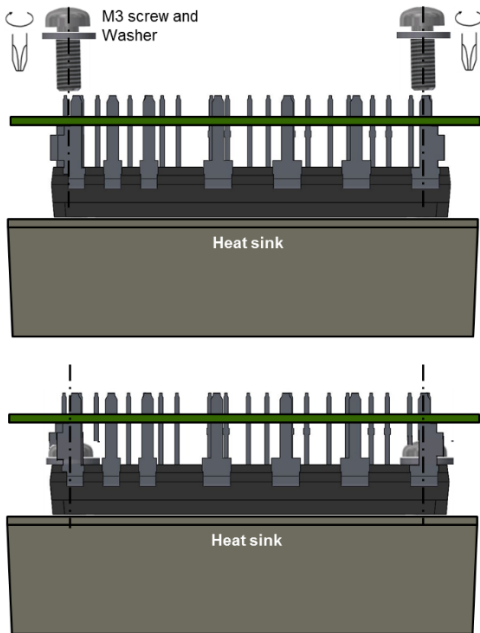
Process Flow of Soldering ASPM 27 Package (When PCB Mounting First)
